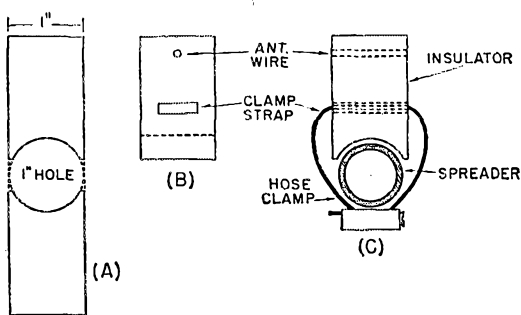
Sketch showing details of the adjustable element insulators. Two insulators are made by drilling a 1-inch hole in a sheet of 1-inch Plexiglas, and then sliding out a strip 1 inch wide, as shown at A. B indicates the holes for the antenna wire and pipe-clamp strap. C shows how the insulator is attached to the spreader.
